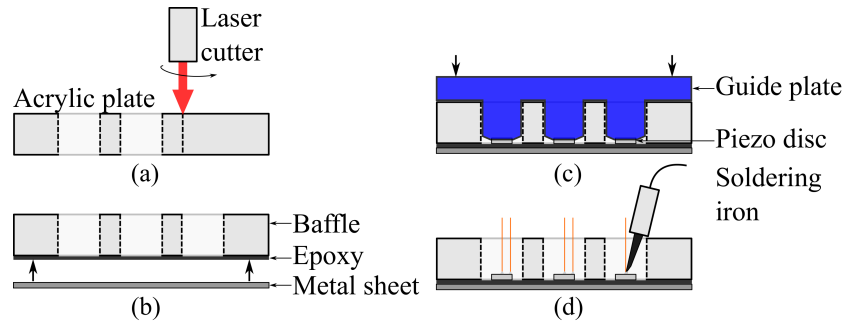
Step by step construction guide of flexural array transducer, using a single sheet of metal and a baffle back structure. (a) The baffle is made by machining an acrylic plate with a computer controlled laser cutter. (b) The baffle is bonded to the metal plate using a two component epoxy. (c) The piezoelectric discs are bonded to the plate using a 3D printed guide and the same epoxy is applied to the ground electrode. (d) Connections are soldered to the piezoelectric elements.
